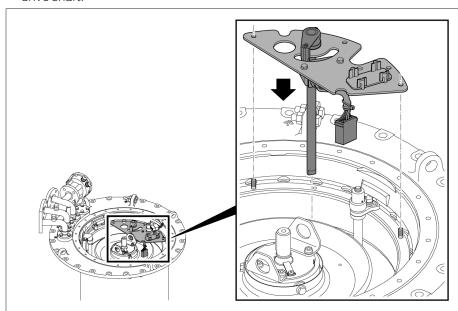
Mounting plate with tap-change supervisory device and the drive shaft
